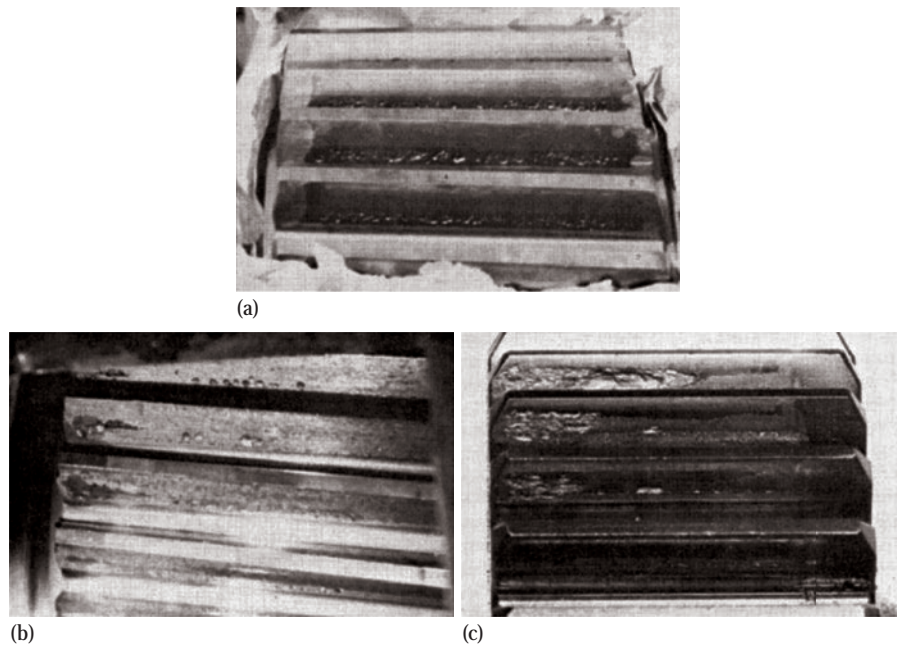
Examples of gross pitting: (a) helical, 35 HRC; (b) helical, 35 HRC; and (c) spur, 60 HRC. This kind of pitting is clearly destructive pitting. Lower view shows both gross pitting and spalling.
